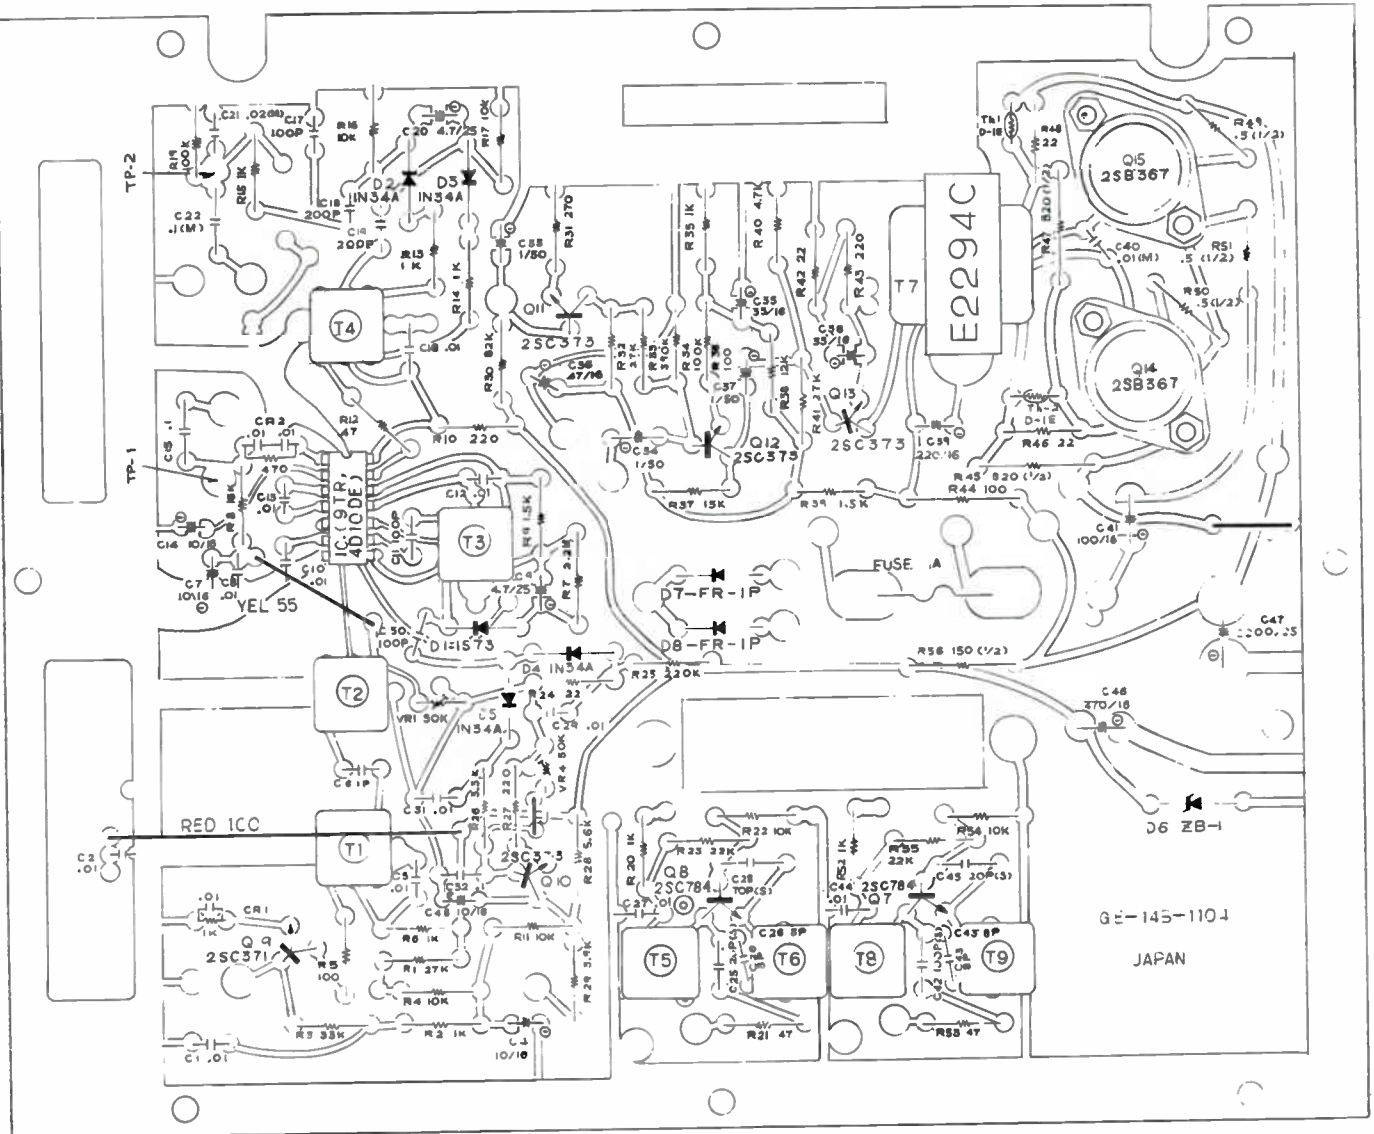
PRINTED CIRCUIT BOARD TOP VIEW FOR PRO-2
